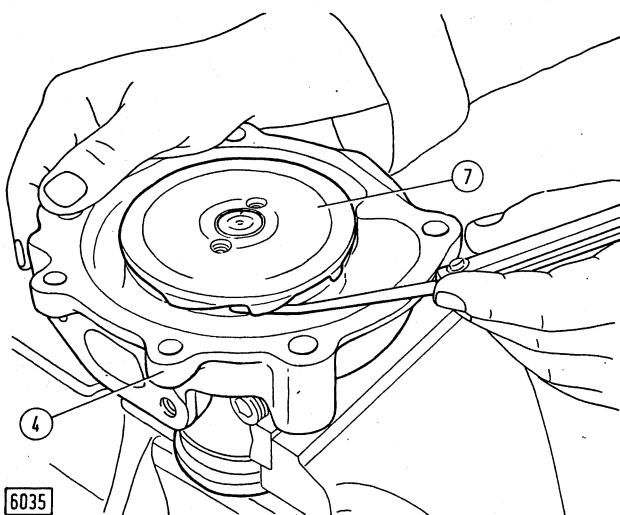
Checking clearance between impeller (7) and water pump body (4).
